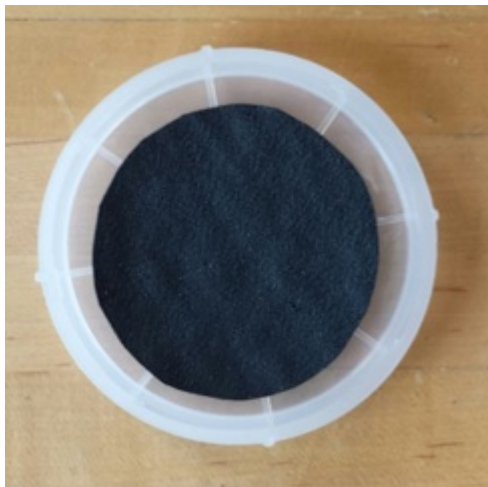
Polymer Wafer samples cut from Extruded and Rolled Sheets
